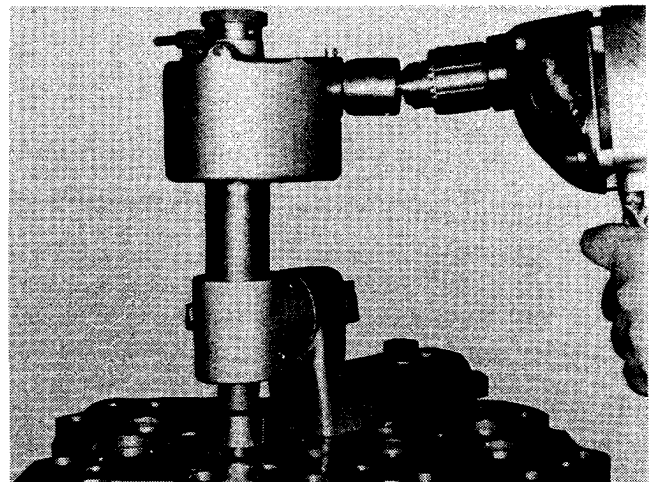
, (N10288). Counterboring for valve seat with ST-257
